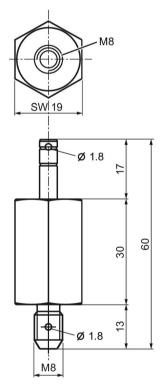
Dimension drawing of quick change holder 6GT2690-0AH00
